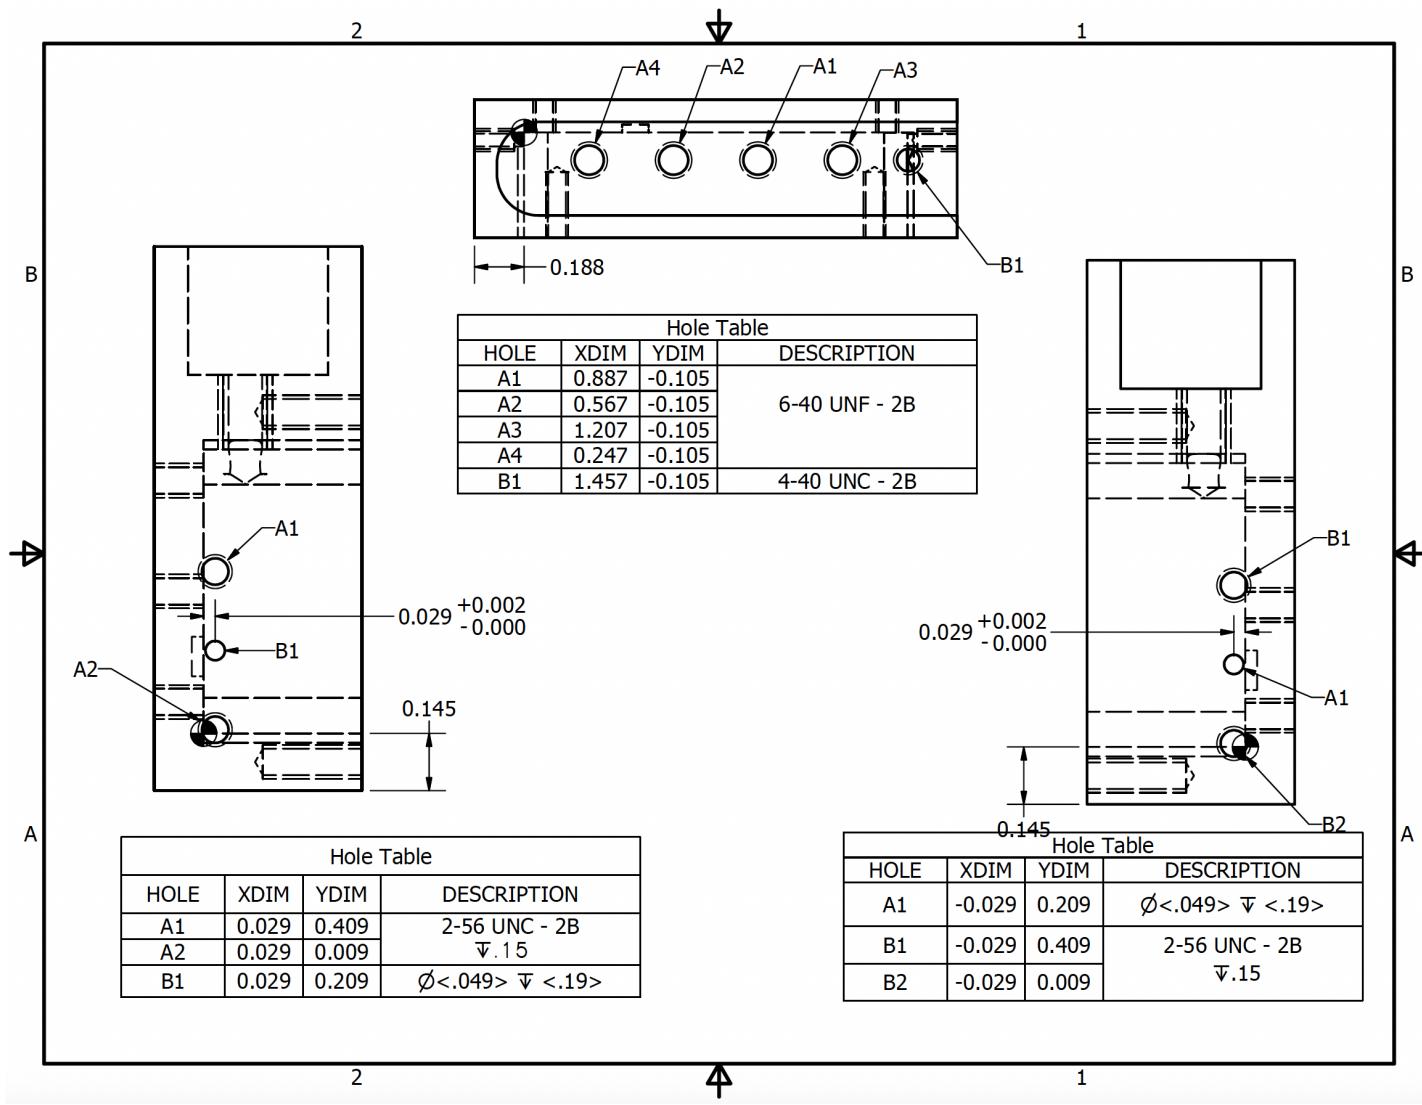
1050-A Attemptifier Enclosure Drawing 3
